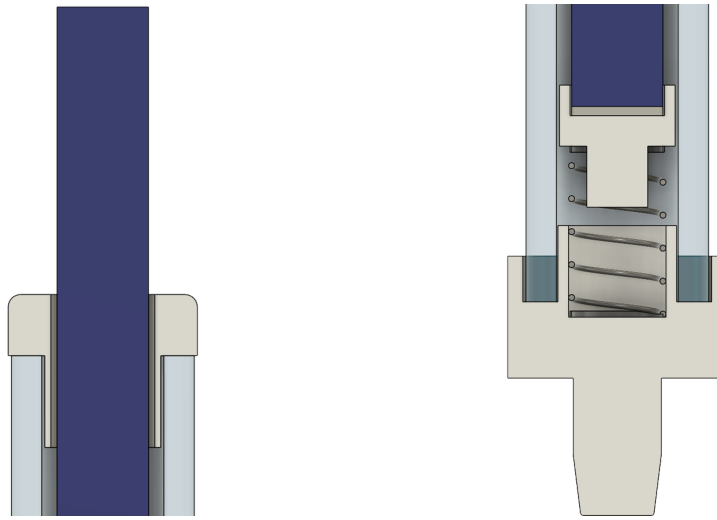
Left: Side cut of the upper part of the Bubo assembly. The OWL fibre is not connected to the 3D printed part. Right: Side cut of the lower part of the Bubo assembly.
